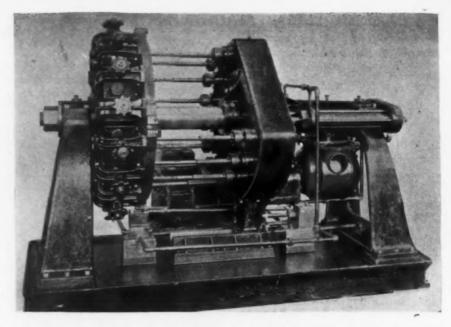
High-Production Piston Drilling Machine. The feed is furnished through a hydraulic pump driven by individual motor. Production ranges from 250 to 360 pistons an hour, bored, sizere a med and finishreamed to an accuracy within 0.001 in.
